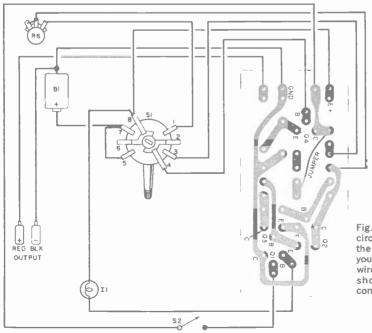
If you use a printed circuit board, these will be the only wiring connections you will have to run. Jumper wire shown on the circuit board should be mounted on the component side of the board.
